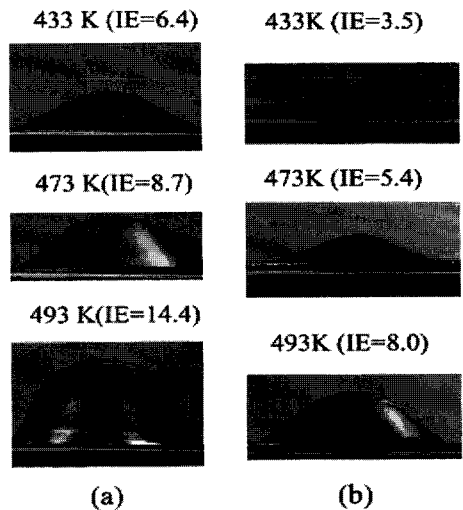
The specimens after Erichsen test, where (a) the cross-rolled and (b) the normal-rolled specimens.
